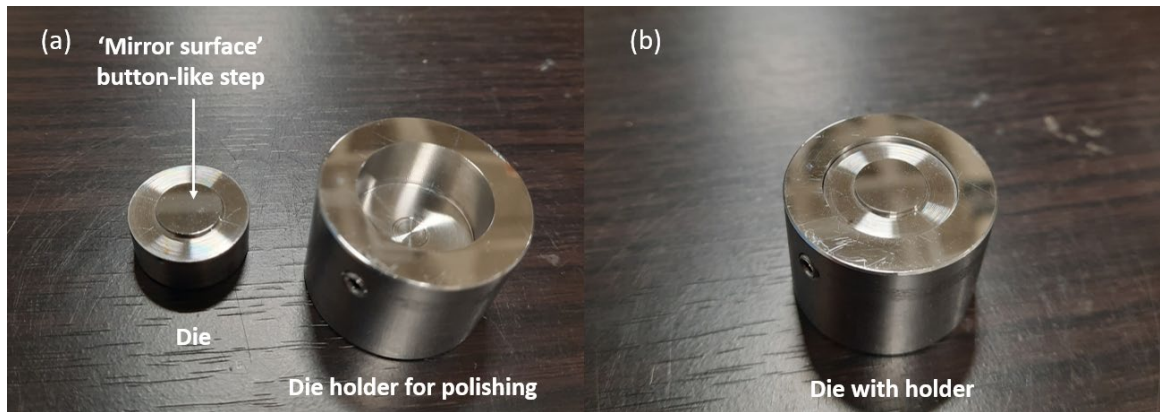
1 Die and its polishing holder (a) before and (b) after assembled.
